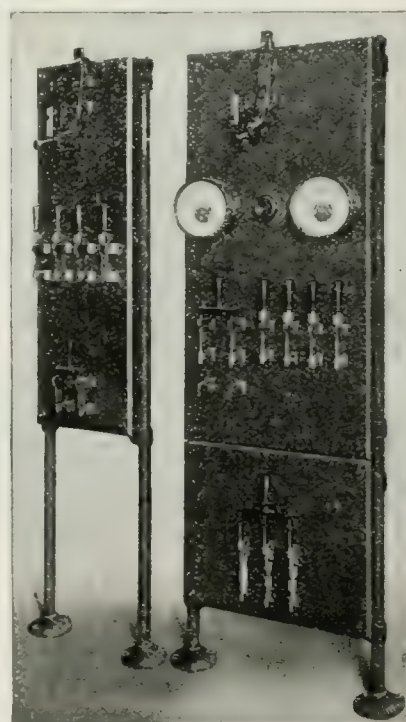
SWITCHBOARD PANELS FOR ARC WELDING. Generator control panel on the right; outlet panel on the left.
